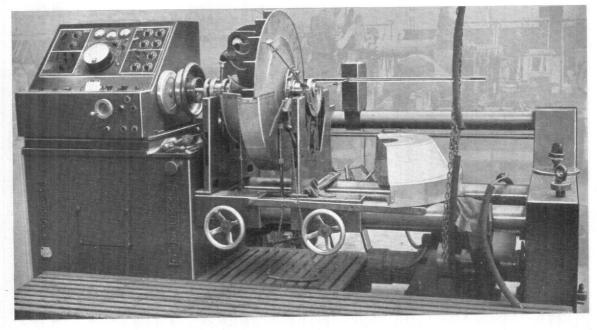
Impeller in Gisholt 3 U.J.P. balancing machine.
